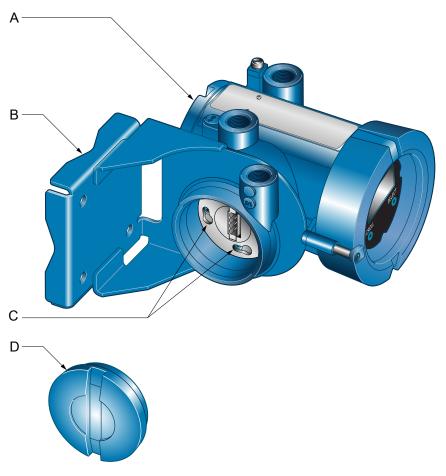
Components of 4-wire remote mount transmitter (aluminum housing)
